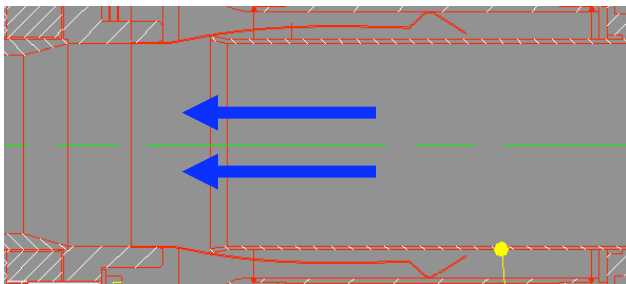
Original AutoCAD assembly of the finger assembly. The blue arrows indicate the direction that the *fingers* move relative to the inserted cone. In this design, stress is relieved during the bake out process, before the fingers slide back into place when the magnet has cooled back down to room temperature.⁶
